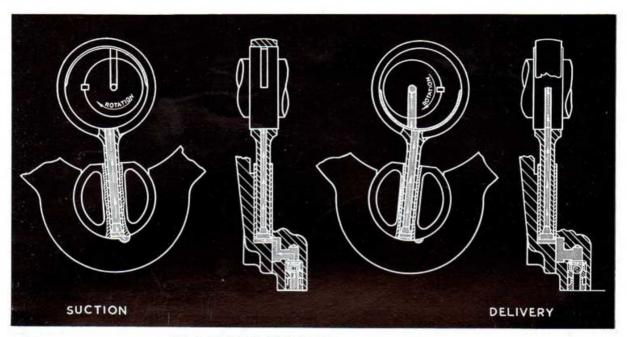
GEARBOX OUTPUT OIL PUMP (PLUNGER TYPE).
